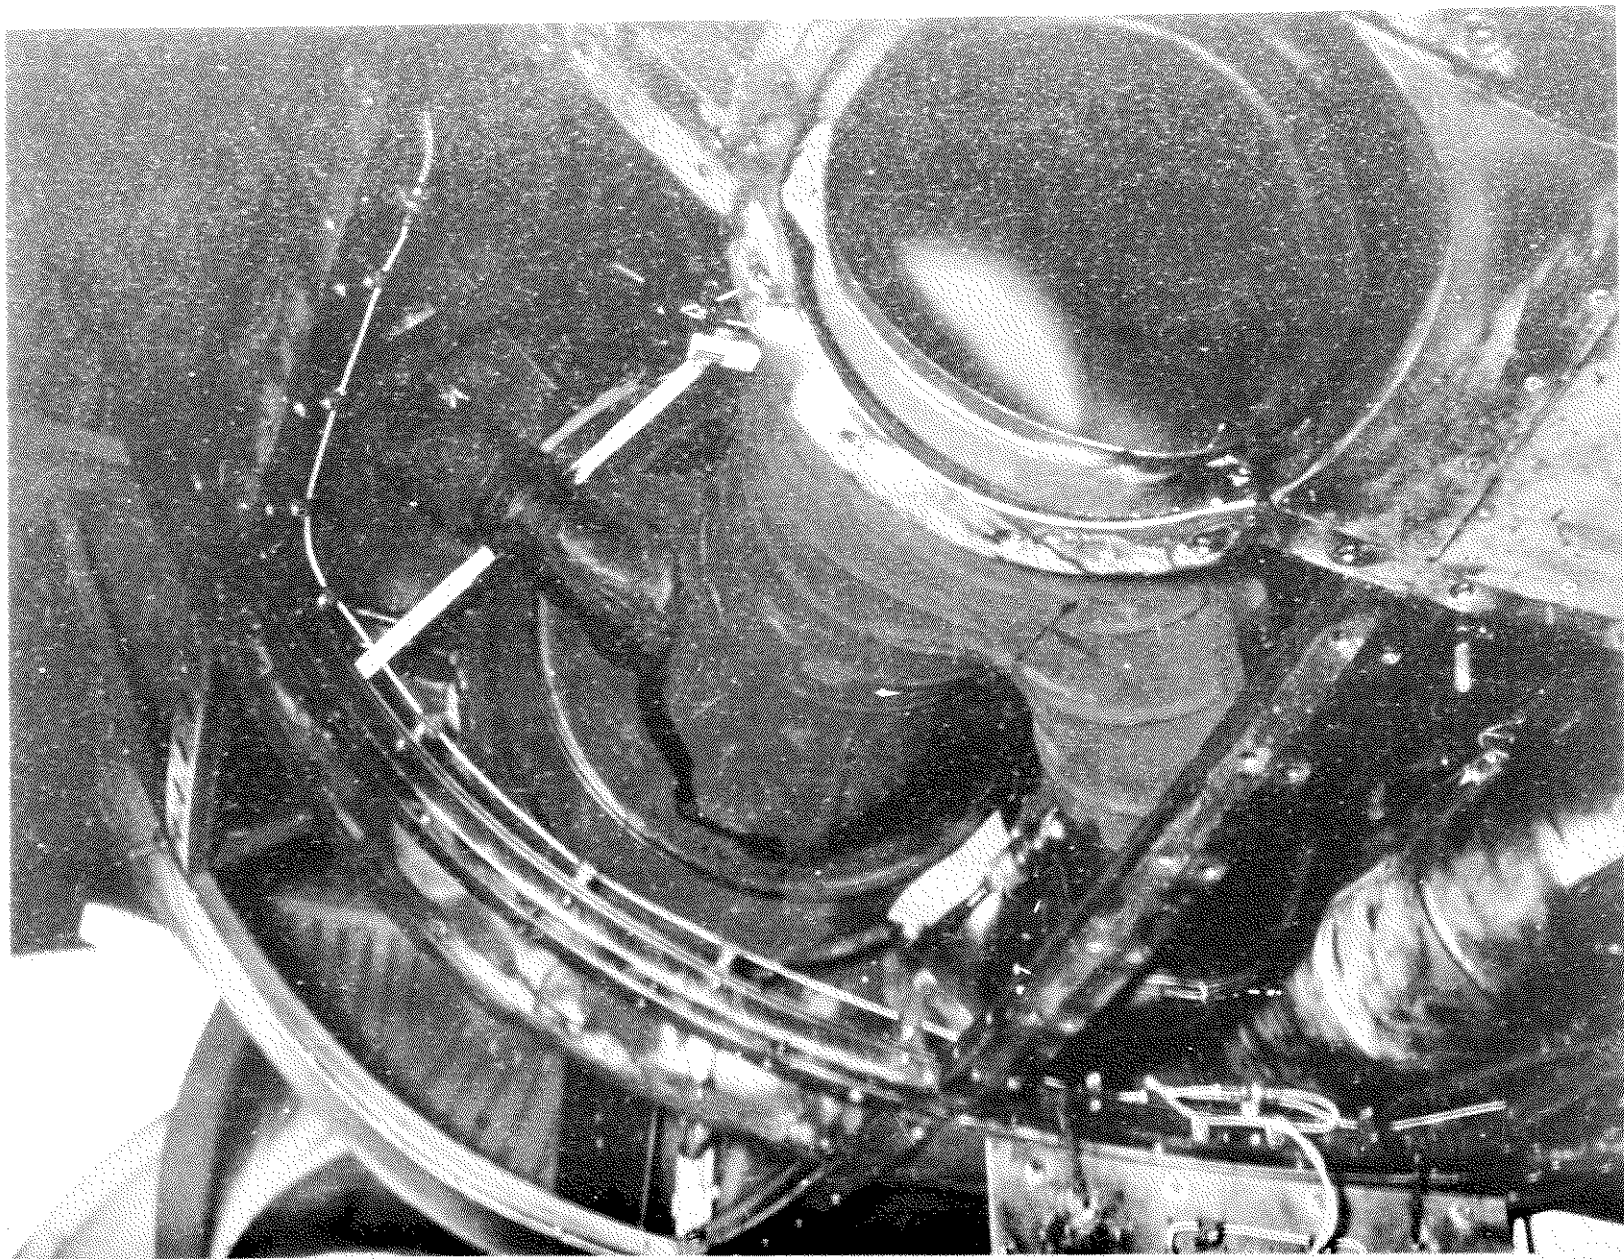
A VIEW SHOWING LOOP ATTACHED TO LOWER FORMERS
